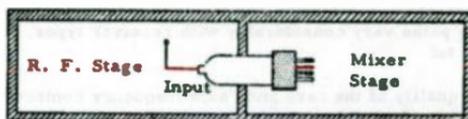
Mounting of Vacuum Tube Through Internal Shield
